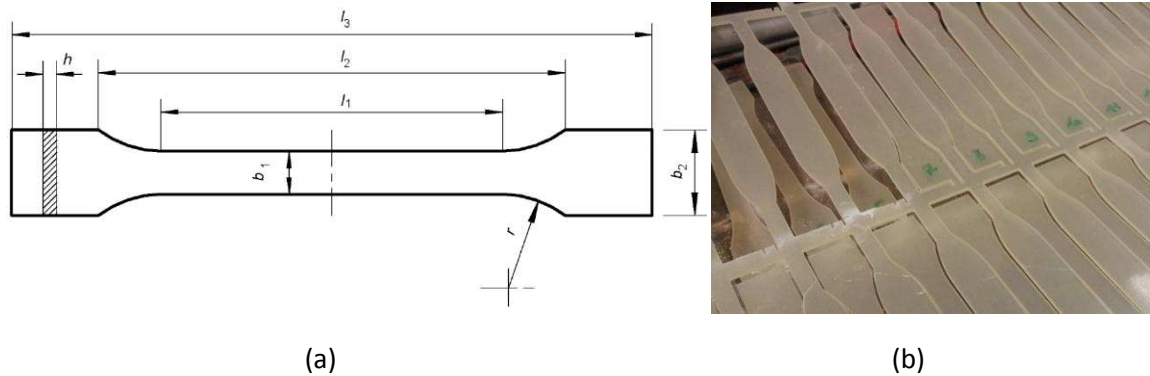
Tensile test resin specimen dimension (a) and the specimens used for the tests (b).
